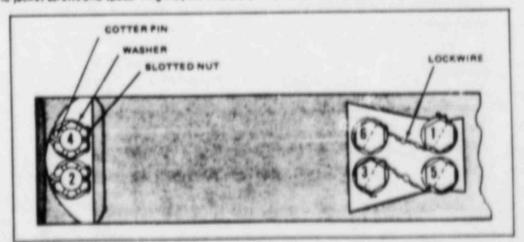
C-15. Tightening Sequence For Connecting Rod Bolts And Nuts
